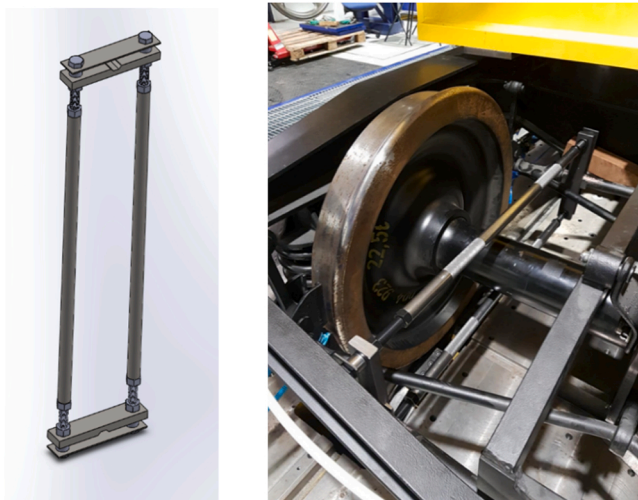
Brake Shorting Mechanism Installed on the Bogie.
